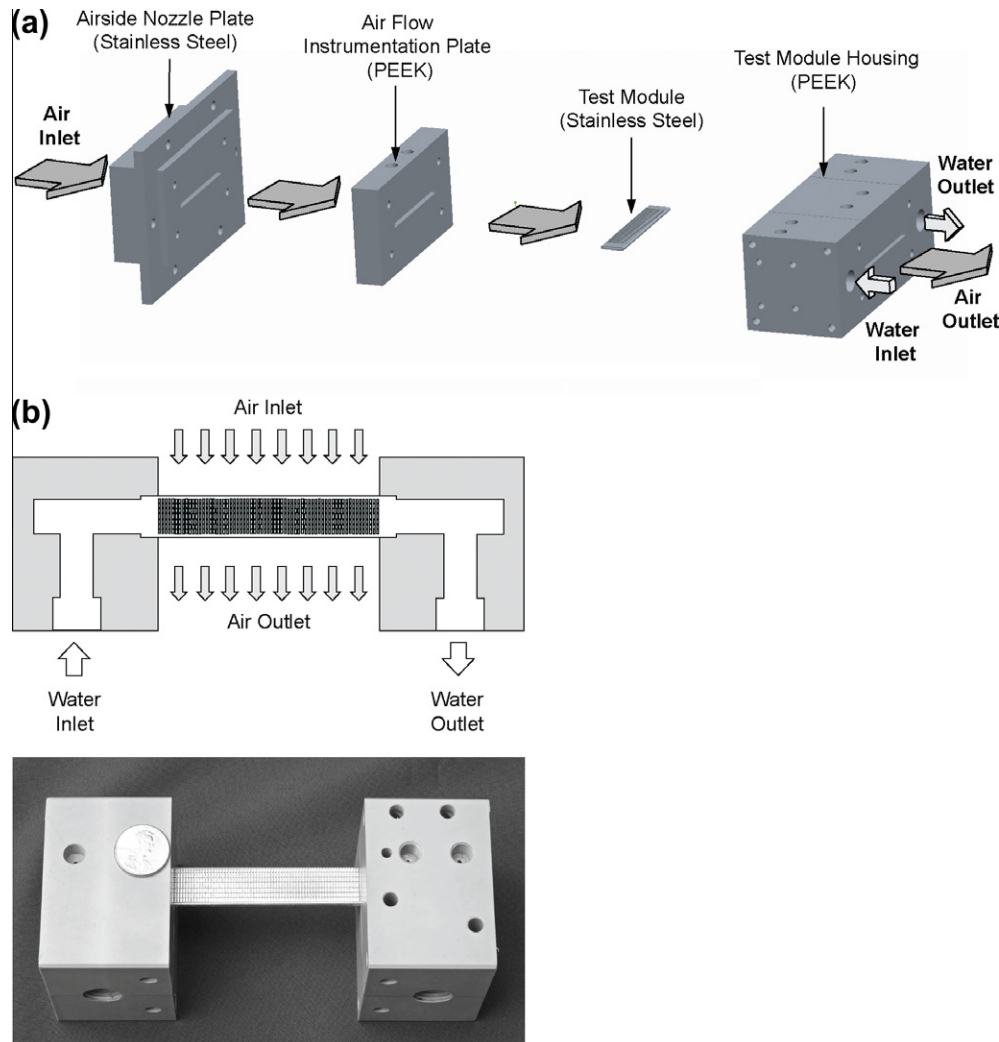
(a) Exploded diagram of air nozzle and test module. (b) Air and water flow paths inside test module housing (middle portion of housing is removed to show micro-channel test module).
